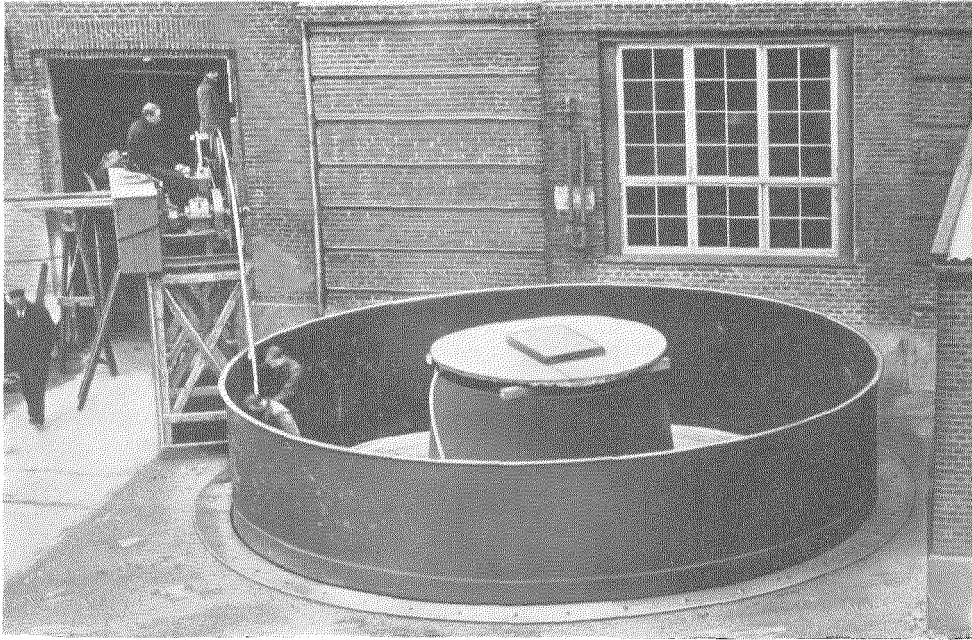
Cable with Final Double Sheath Entering Turning Tank Via Motor Driven Sheaves.
